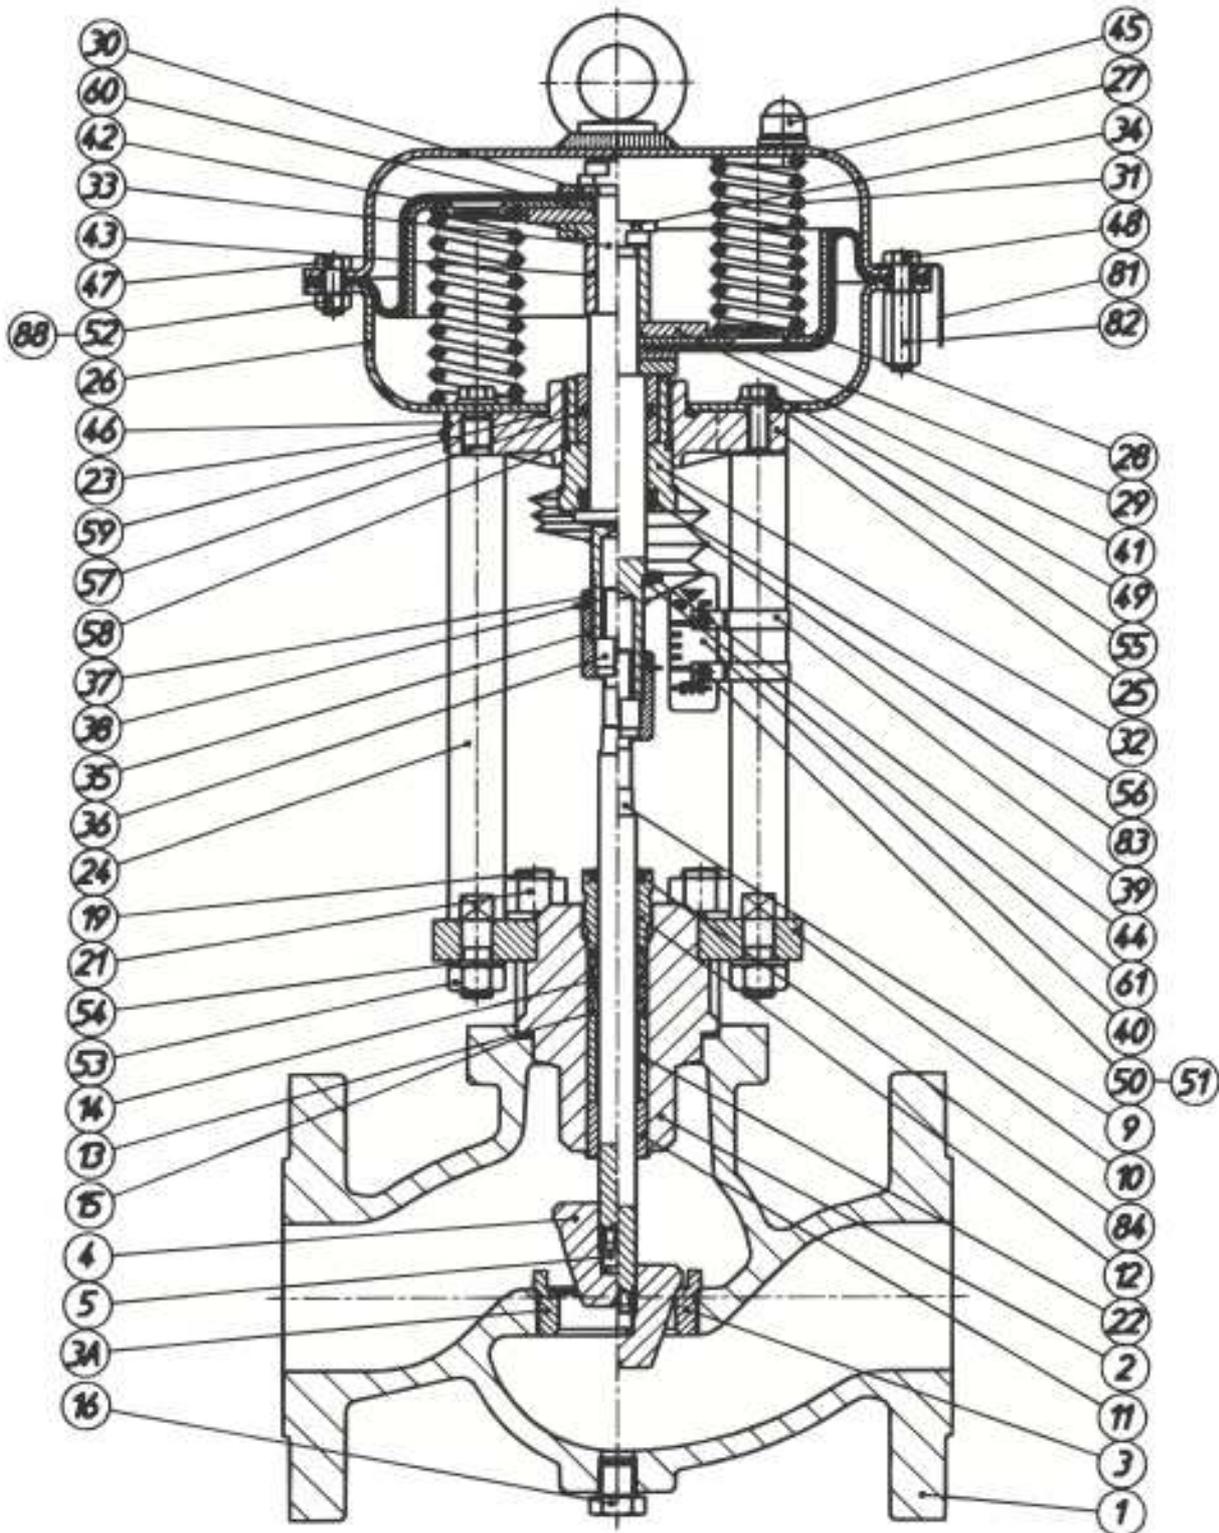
Regulator valve DN 15... 100 with valve plates Kvs = 25... 160, with pneumatic positioning drive
